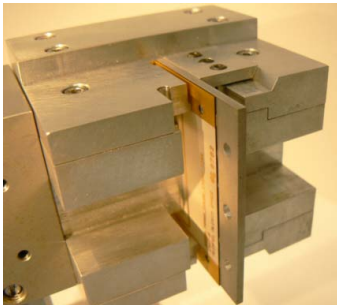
Test fixture for the characterization of a single waveguide-to-microstrip transition in back-to-back configuration. Upper and lower wedges are used to improve electrical contacts between the microstrip metallization and the test fixture and to ensure that the tray remains fixed.
